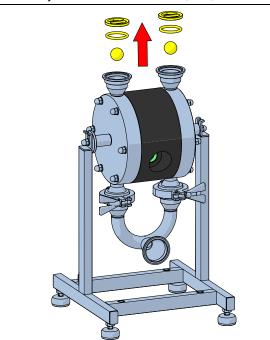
Unscrew and remove 2 x tri-clamps [138] connecting the manifold [132] to the housings [11].
